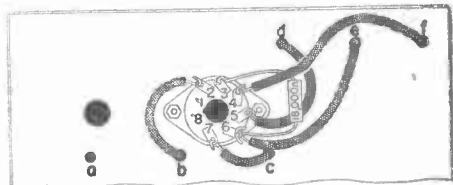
Connections under the chassis for Step 4 of Experiment 20 should be as shown here. To make your circuit conform with this, move the plate lead (coming through hole *e*) from terminal 3 to terminal 6, and connect an 18,000-ohm resistor between terminals 3 and 6.
